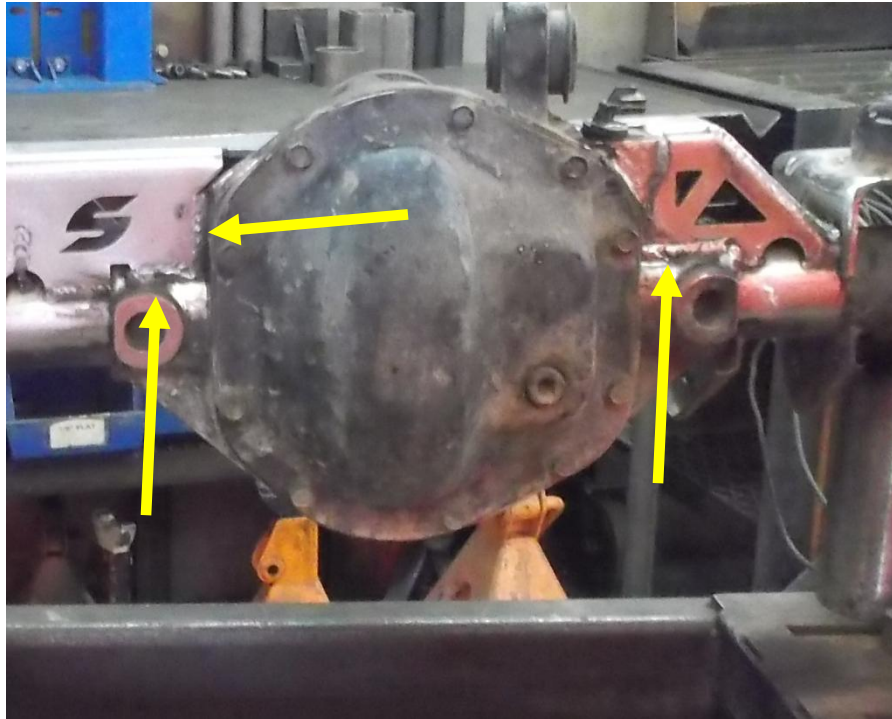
Weld Locations Between Truss and Axle Housing
